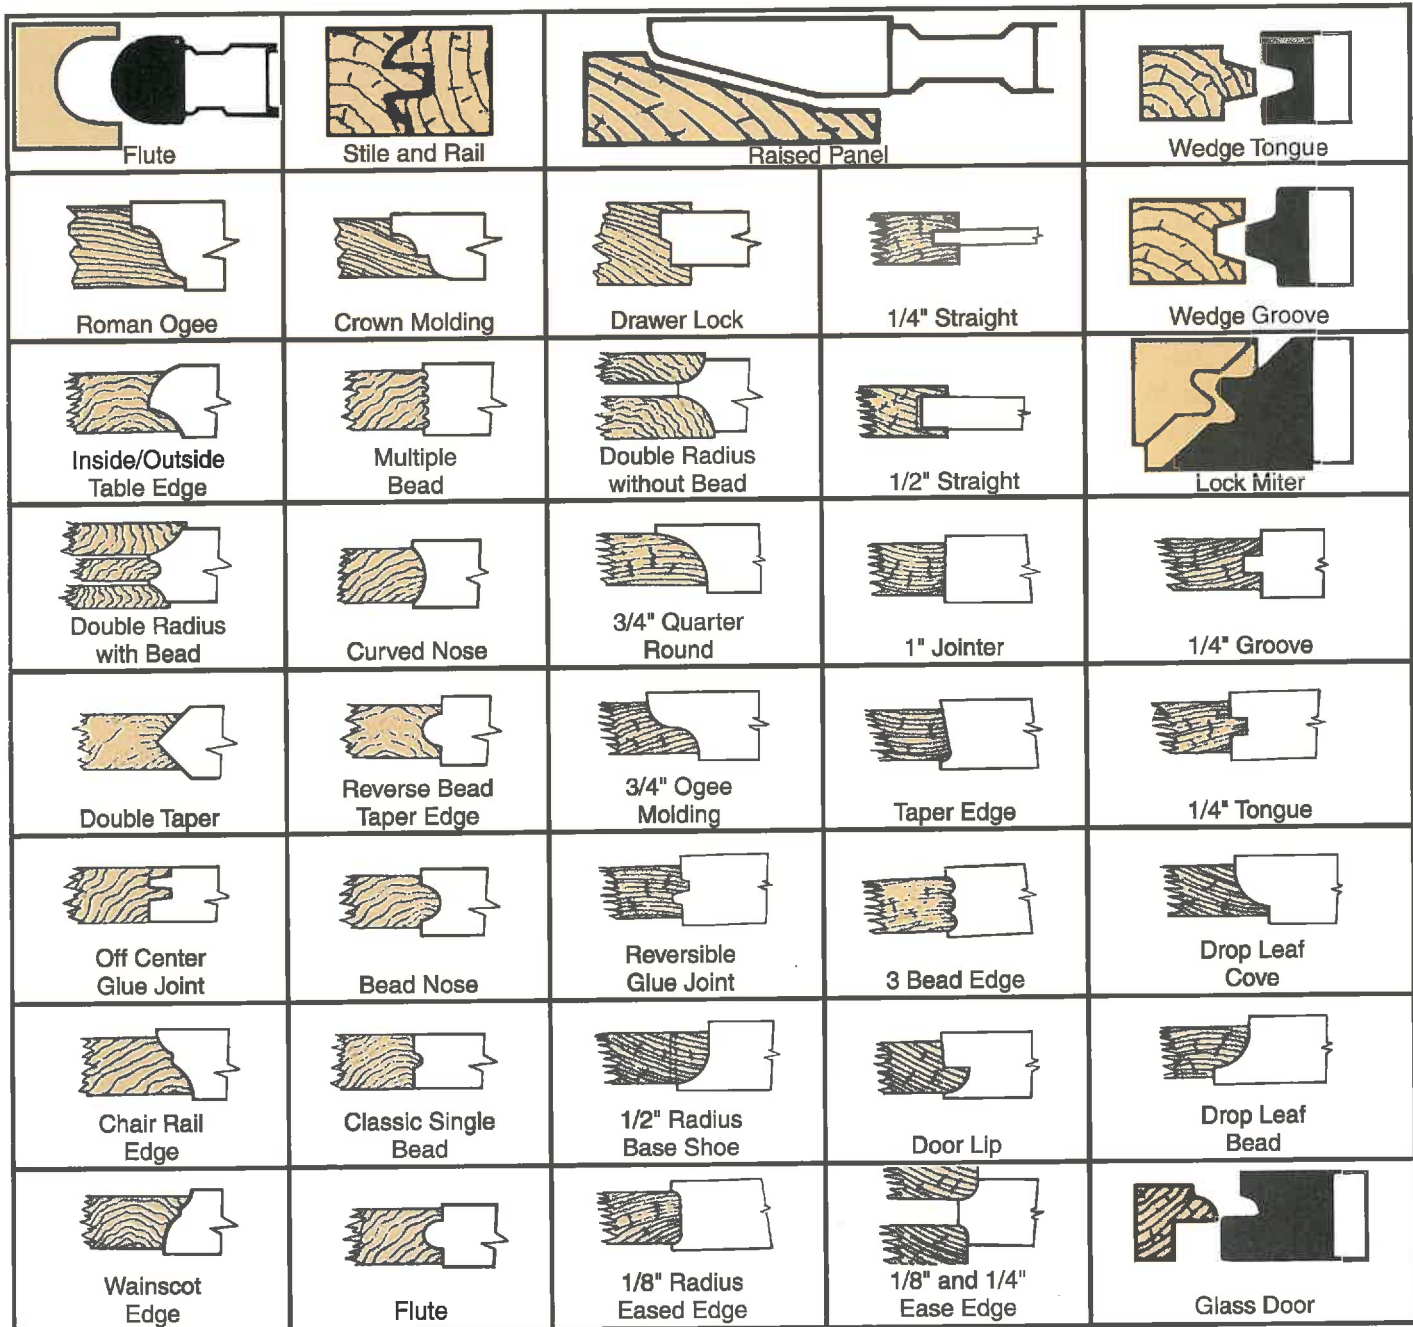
Typical cutter shapers and the workpiece edge they create. (American Machine and Tool Co.)
